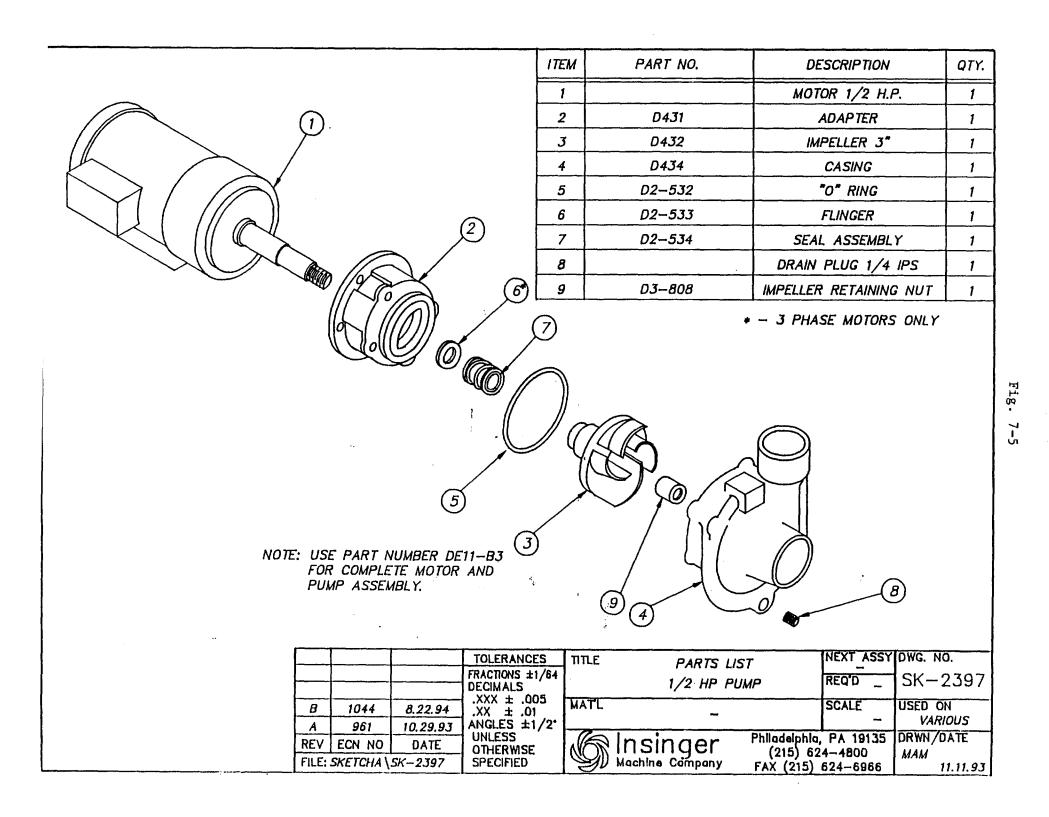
Parts List Drawing - 1/2 HP. Pump
